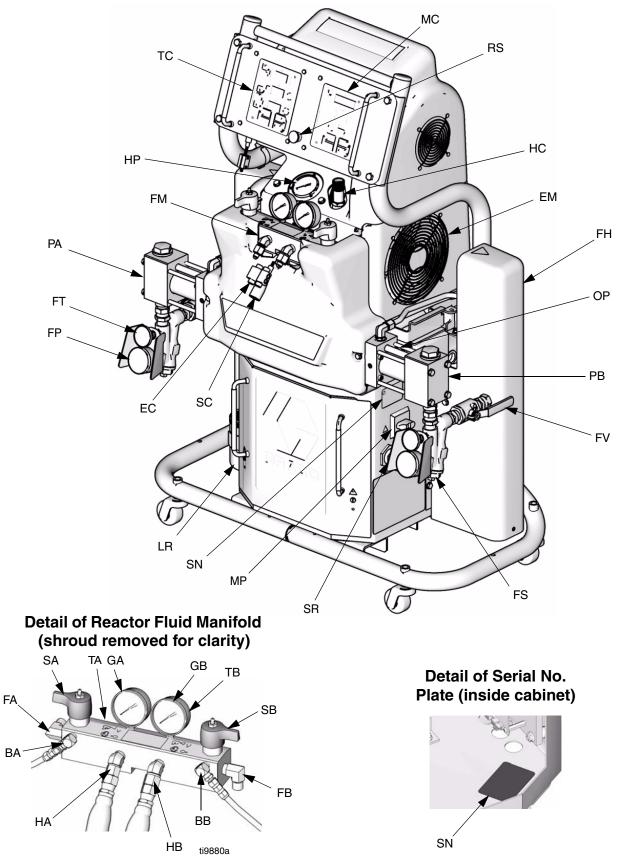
Component Identification (H40 15.3 kW Model Shown)
